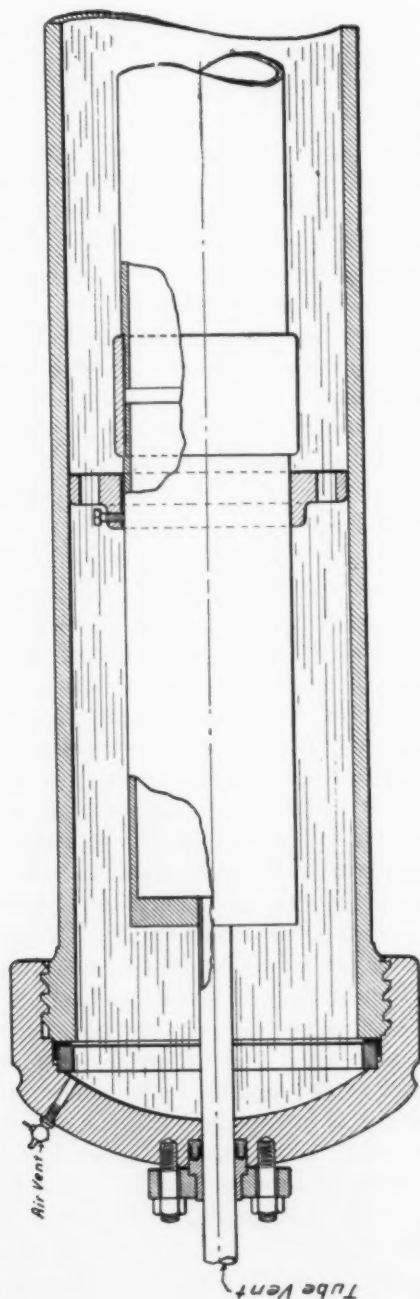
EXPERIMENTAL TUBE WITH COUPLED TEST HEAD SHOWN IN POSITION IN 16" HYDRAULIC TEST CYLINDER.
